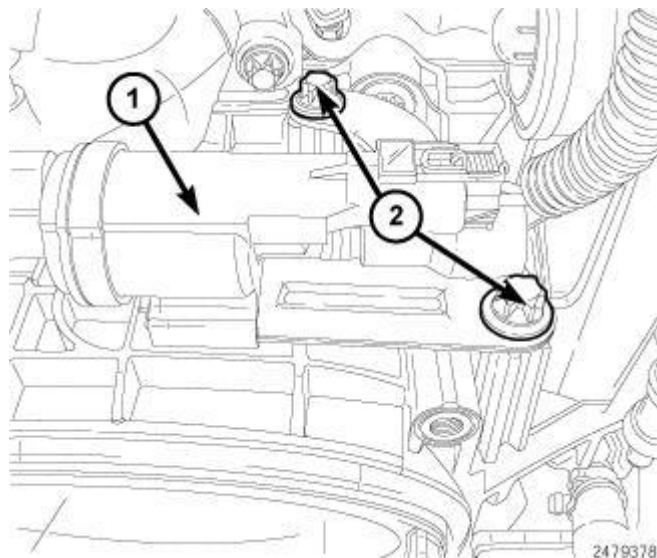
Fuel Rail, Bolts, High Pressure Fuel Tube & Pump
